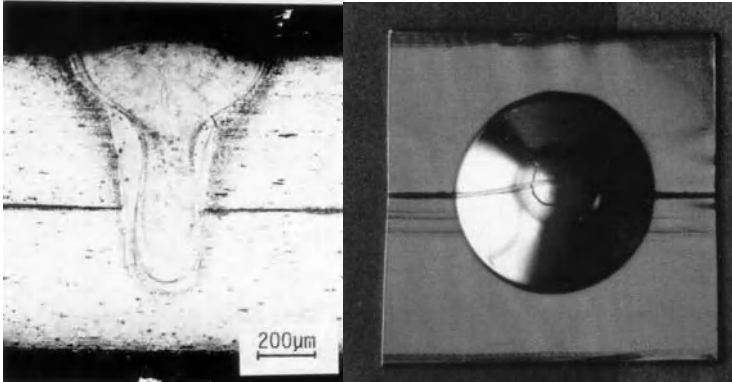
CO₂ laser beam lap weld of X2CrMoTi 18-2 ferritic stainless steel (Institut de Soudure document)
